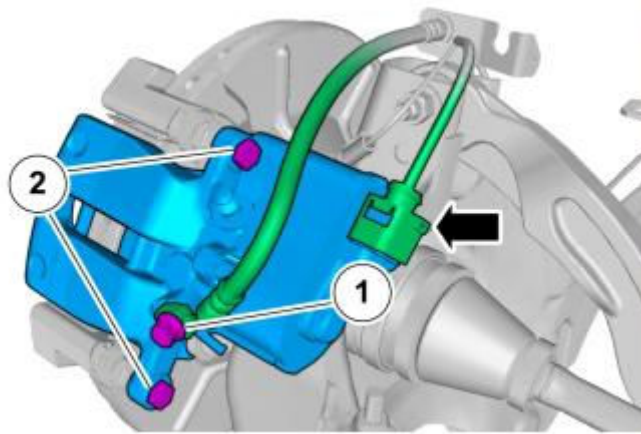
Locating Caliper Bolts And Brake Line Bolt
